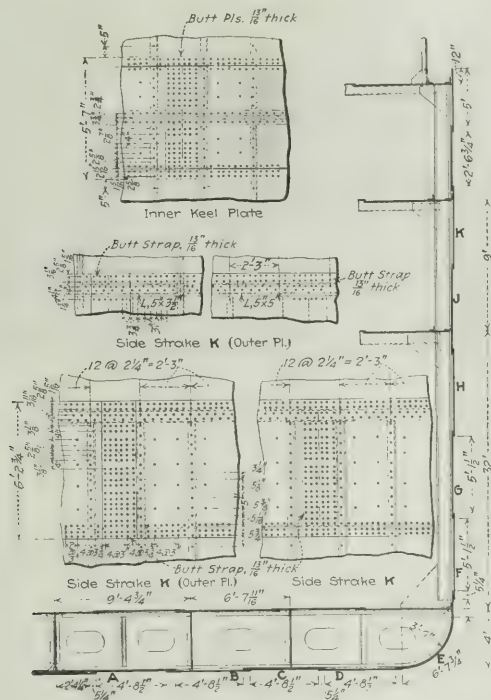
PORTION OF SHEET SHOWING TYPICAL RIVET ARRANGEMENTS FOR MULTIPLE PUNCHING
